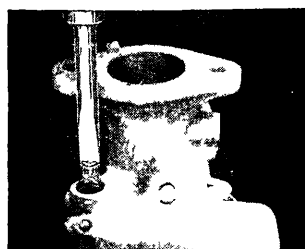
Remove check valve passage plug, strainer, intake and discharge check valves, and copper washer from casting
